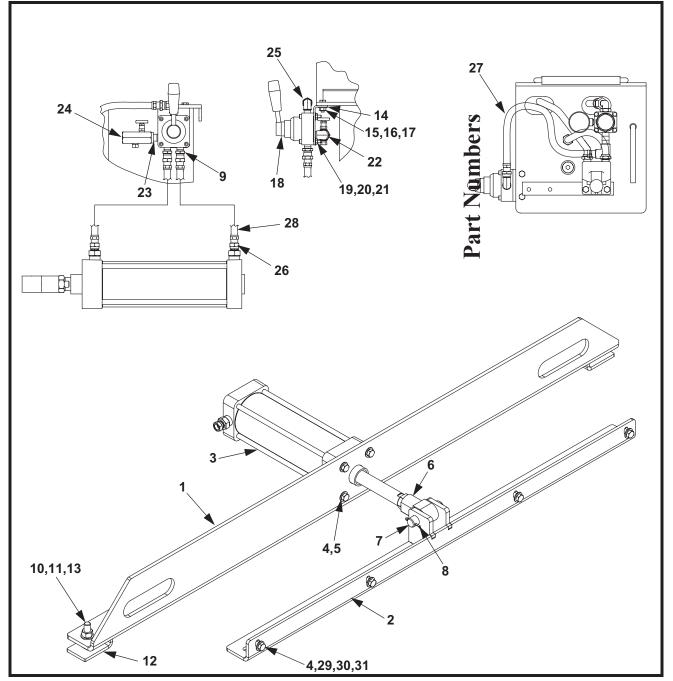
Pneumatic Aligner Assembly, P/N 34140-XXX
